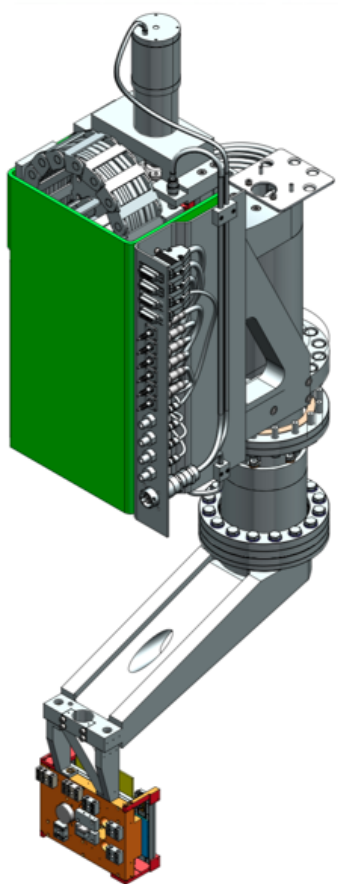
Illustration of the magnet and manipulator geometry. Sample holder with sample for reflection.
